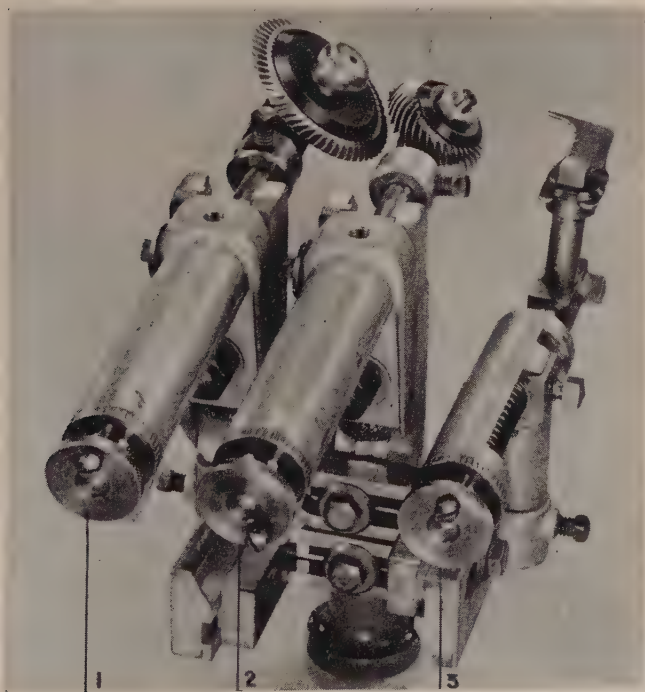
Arrangement for plain jersey: (1) clearing bur; (2) sinker bur; (3) plain presser.
